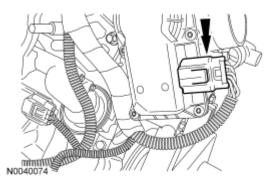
Locating Electronic Throttle Body Electrical Connector Courtesy of FORD MOTOR CO.
